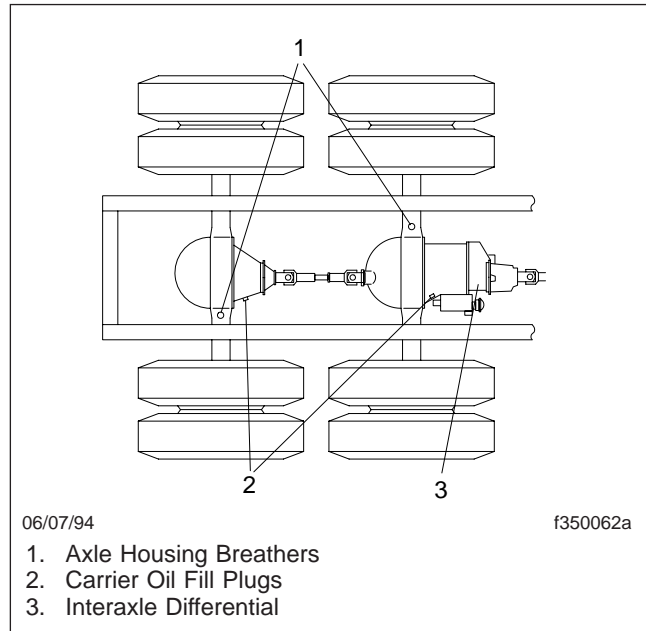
, Fill Hole Plug Locations, Meritor Axles
